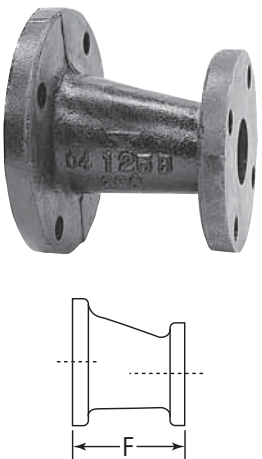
Flanged Concentric Reducer	Size				F		Unit Weight
